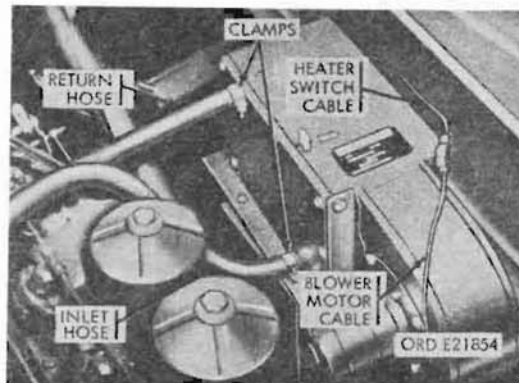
Replacement of inlet and return coolant hoses at heater - multifuel
